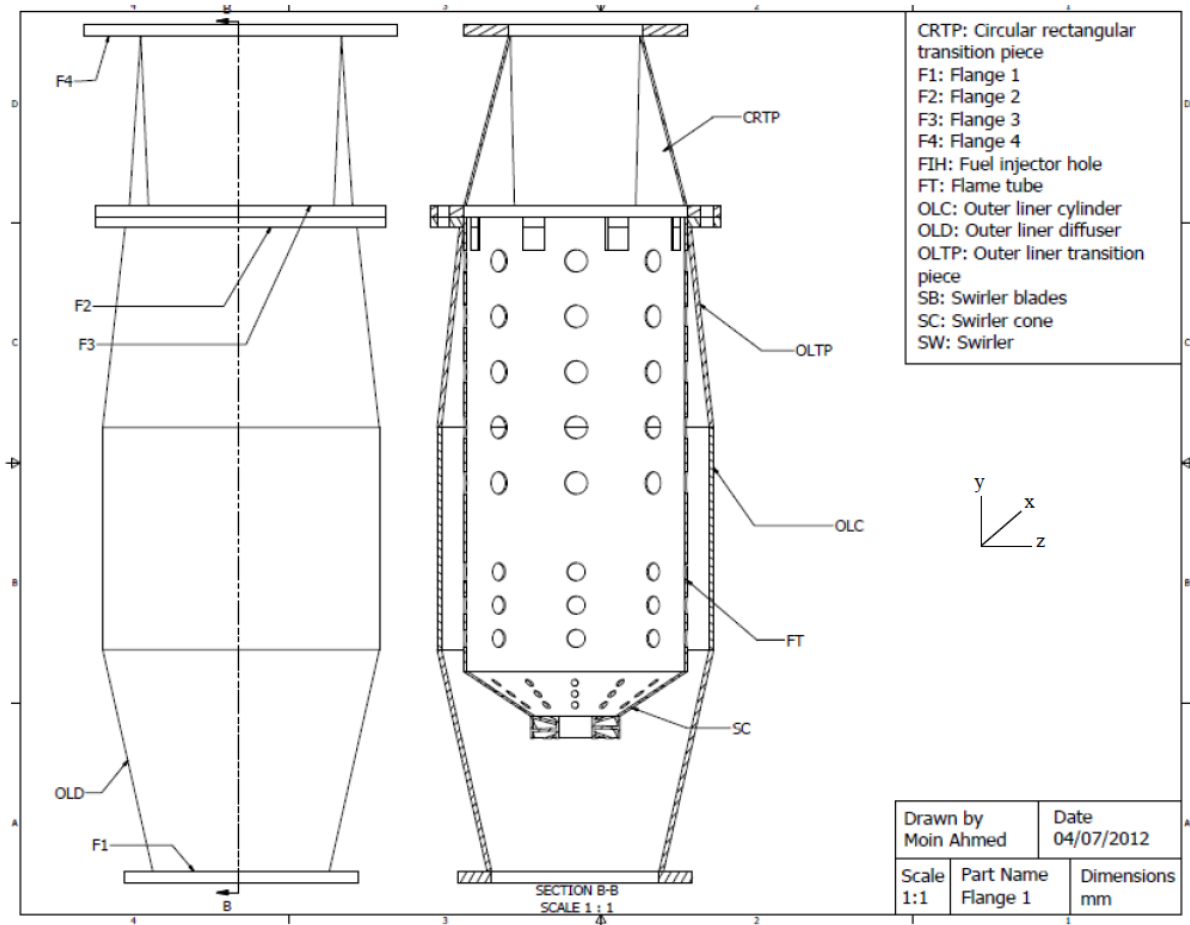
Final assembly drawing of the AxC (re-scaled)
